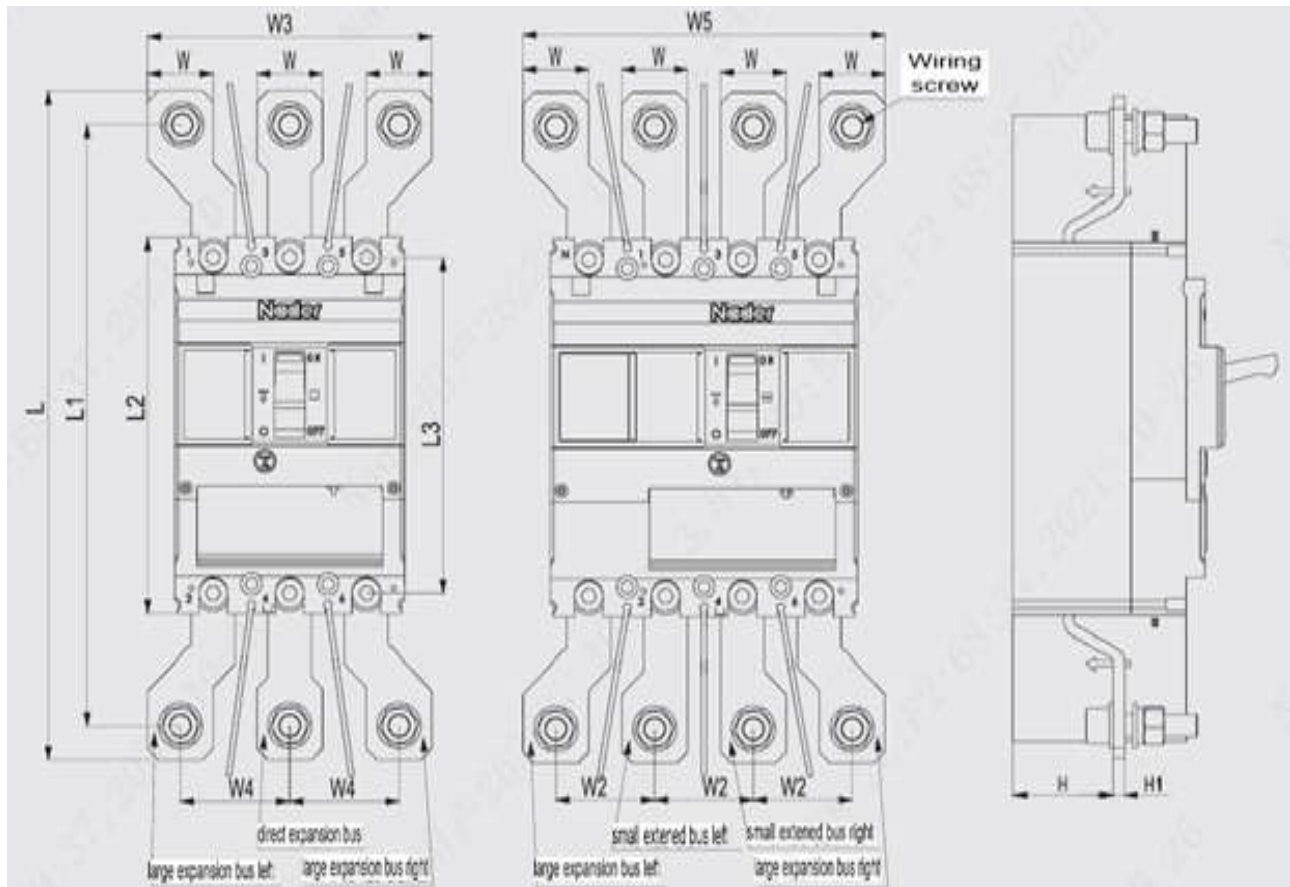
2P、3P、4P Outline and installation dimensions of expansion wiring in front of the board
